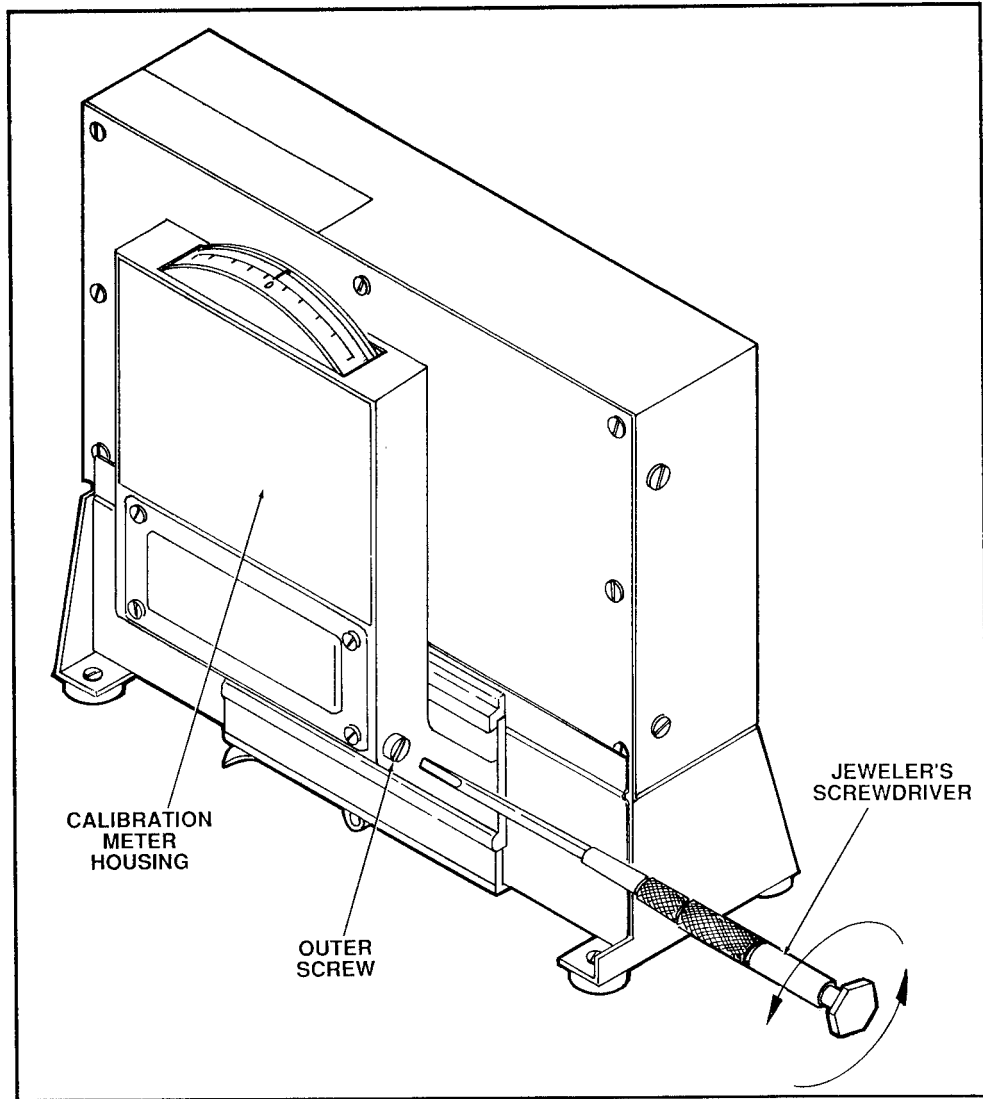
Removing the Outer Screw from Calibration Meter Housing
